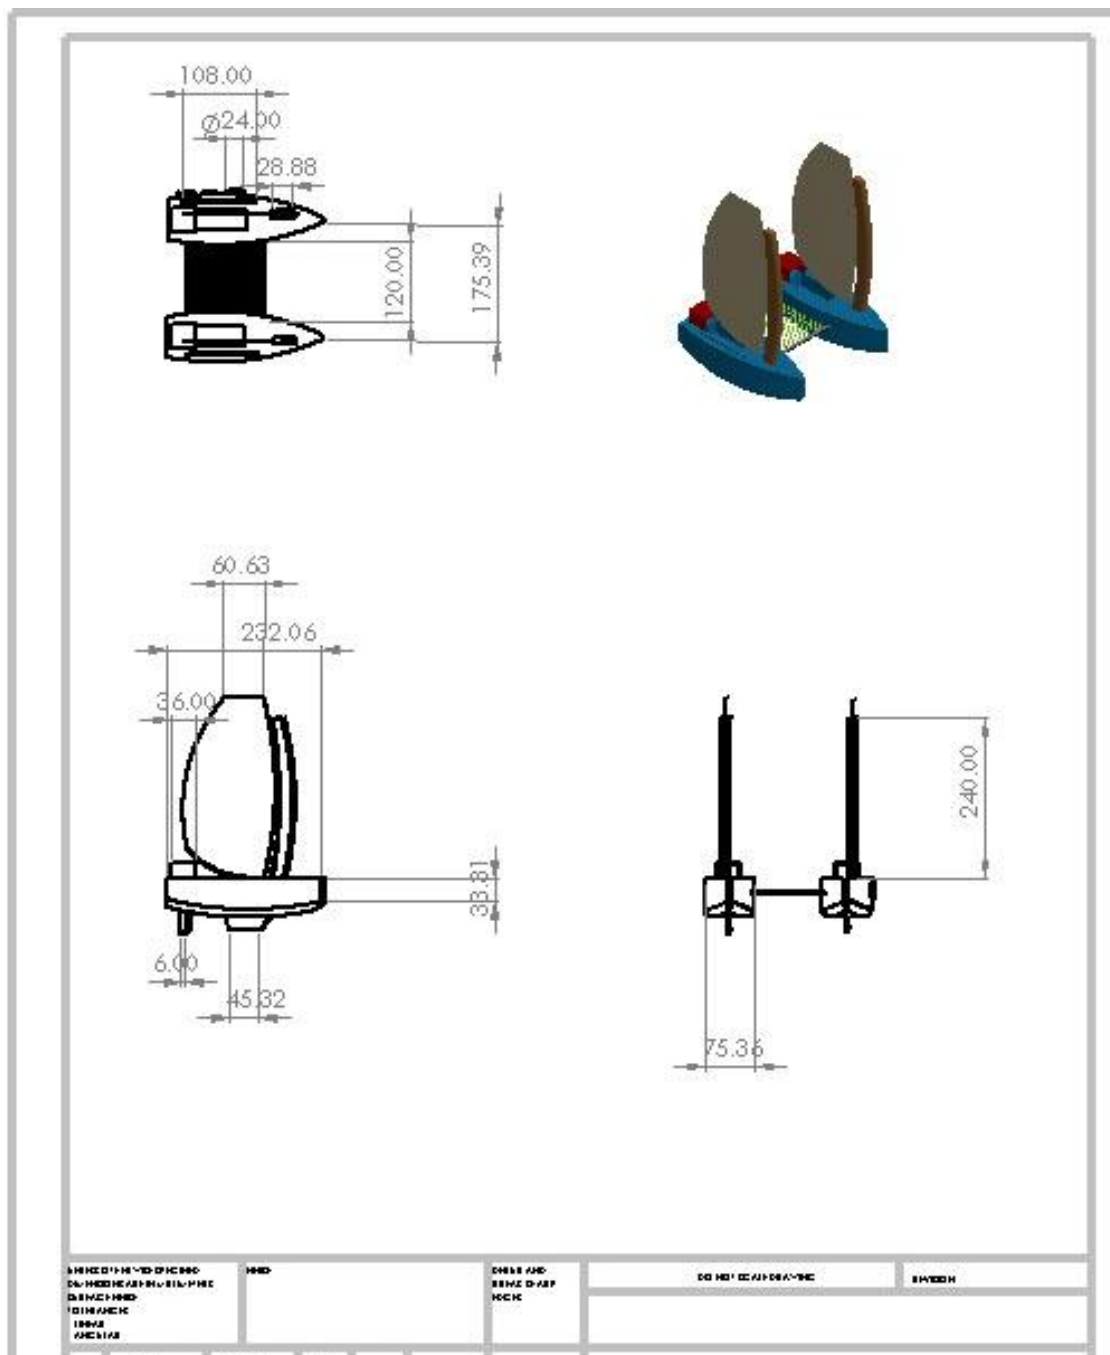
A drawing of the catamaran shows a detailed drawing of the front, right, and top views as well as specific measurements. The dimensions above are in inches. 1 inch: 1/12 of a foot. Although the drawing is a scale version, the original design was full scale.
